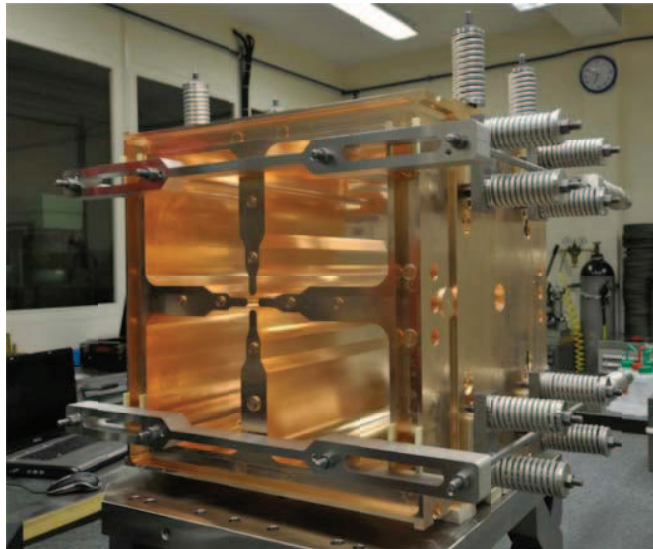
Assembly of the first module of the prototype for the horizontal brazing
